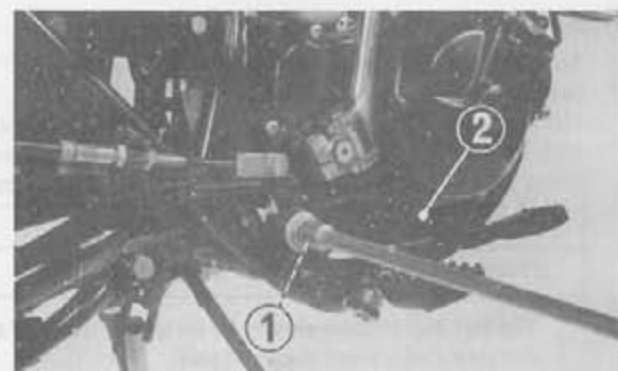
(1) Brake pivot shaft (2) Rear brake pedal
